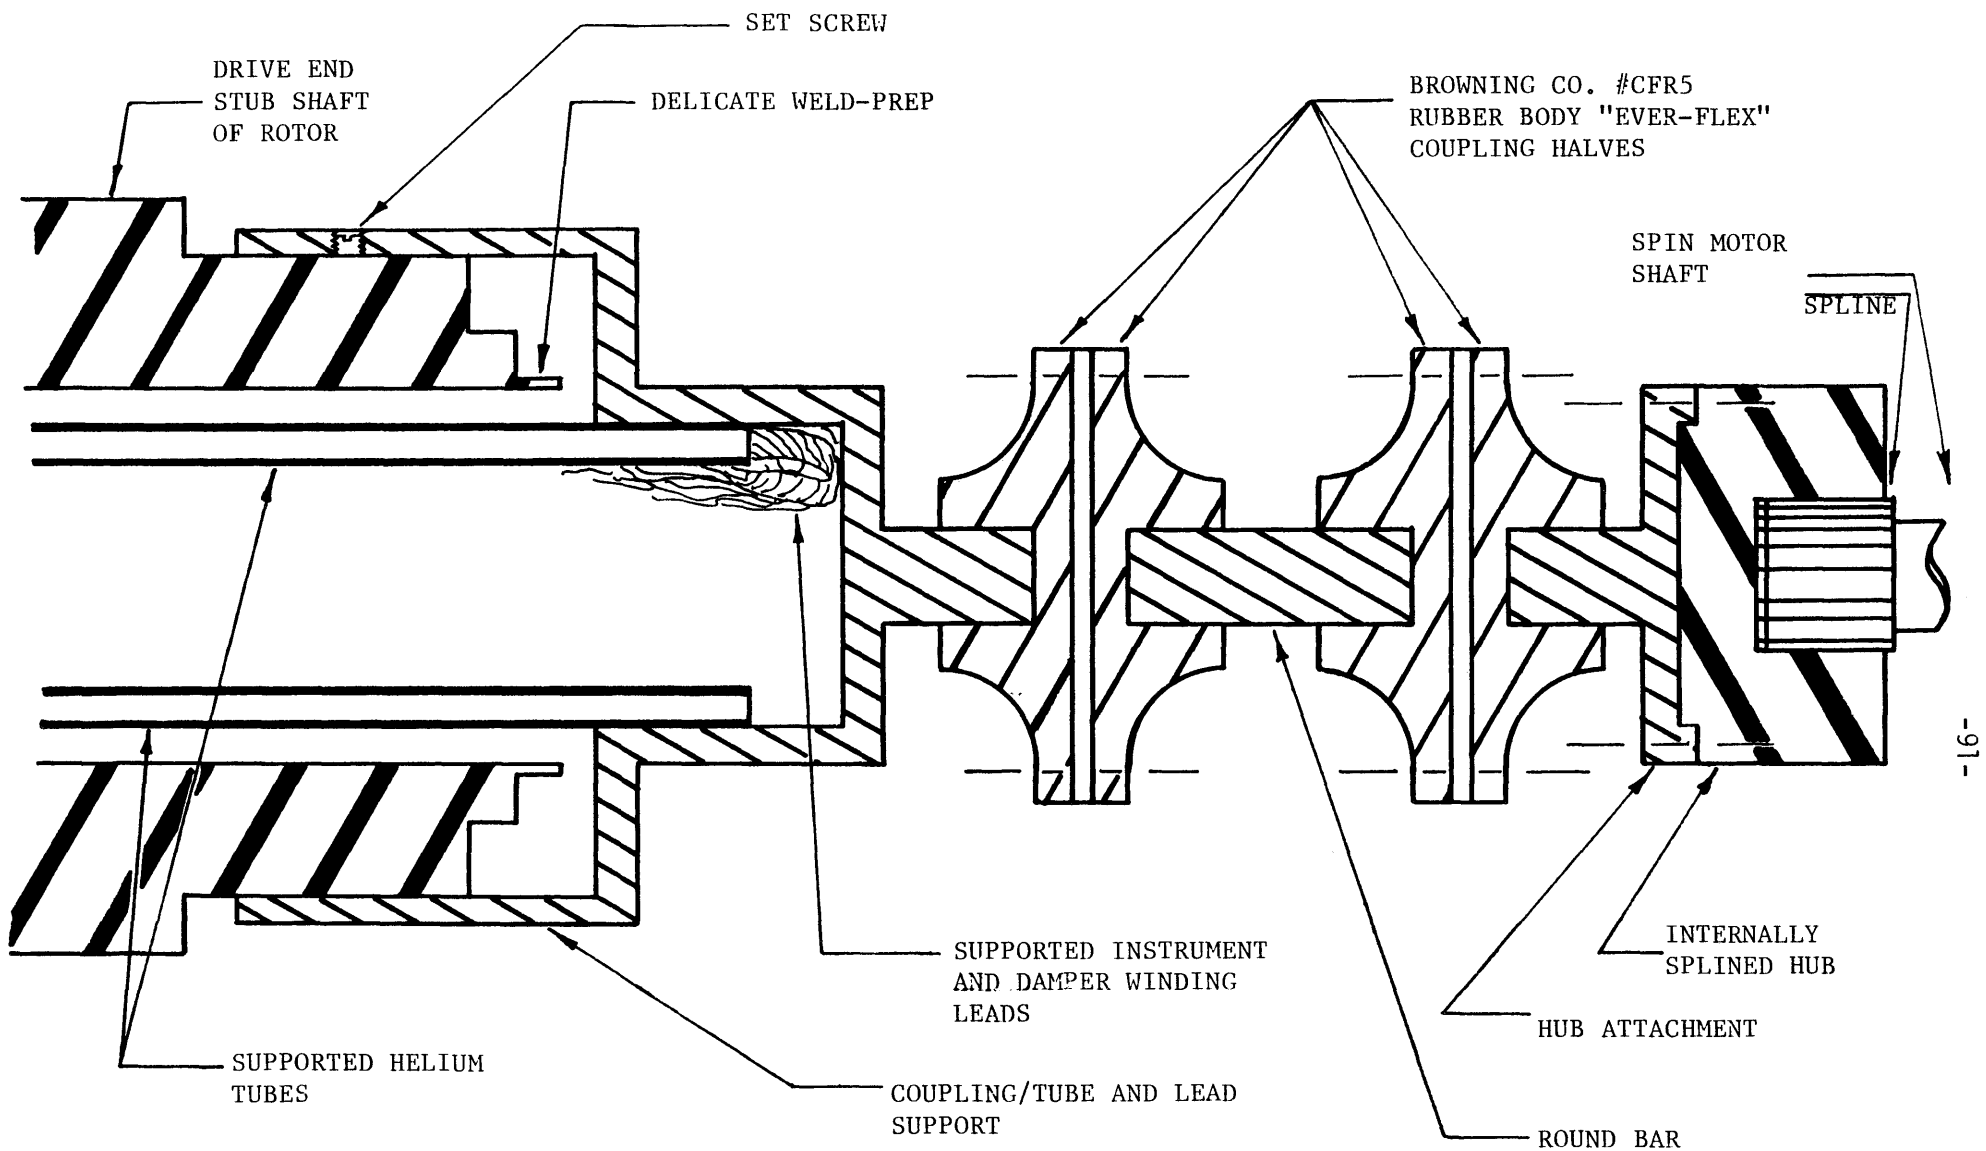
SPIN-MOTOR-TO-SHAFT DRIVE COUPLING
